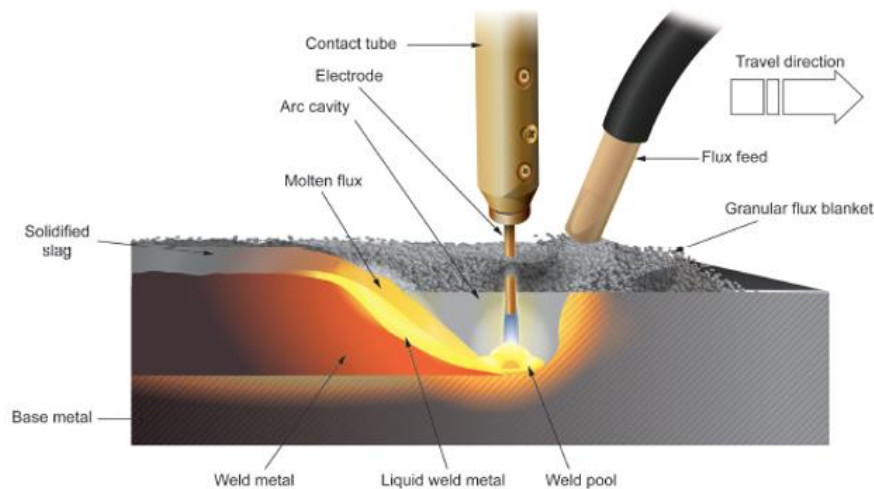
Schematic of welded seam formation under flux cored, [5]
